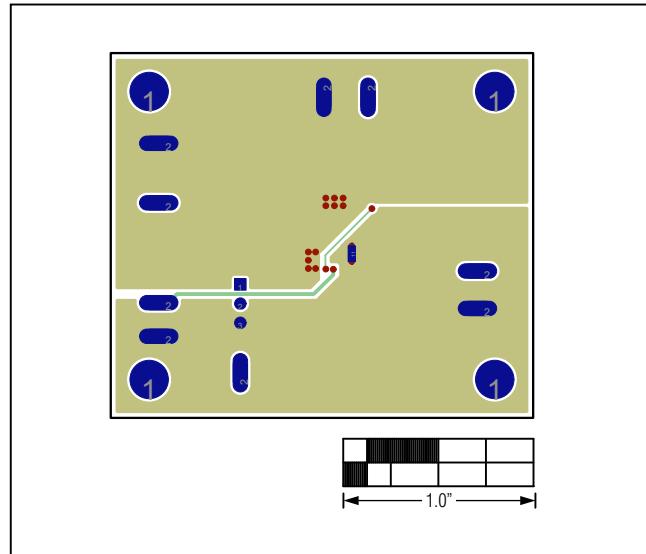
MAX17542G 3.3V Output EV Kit PCB Layout—Solder Side
